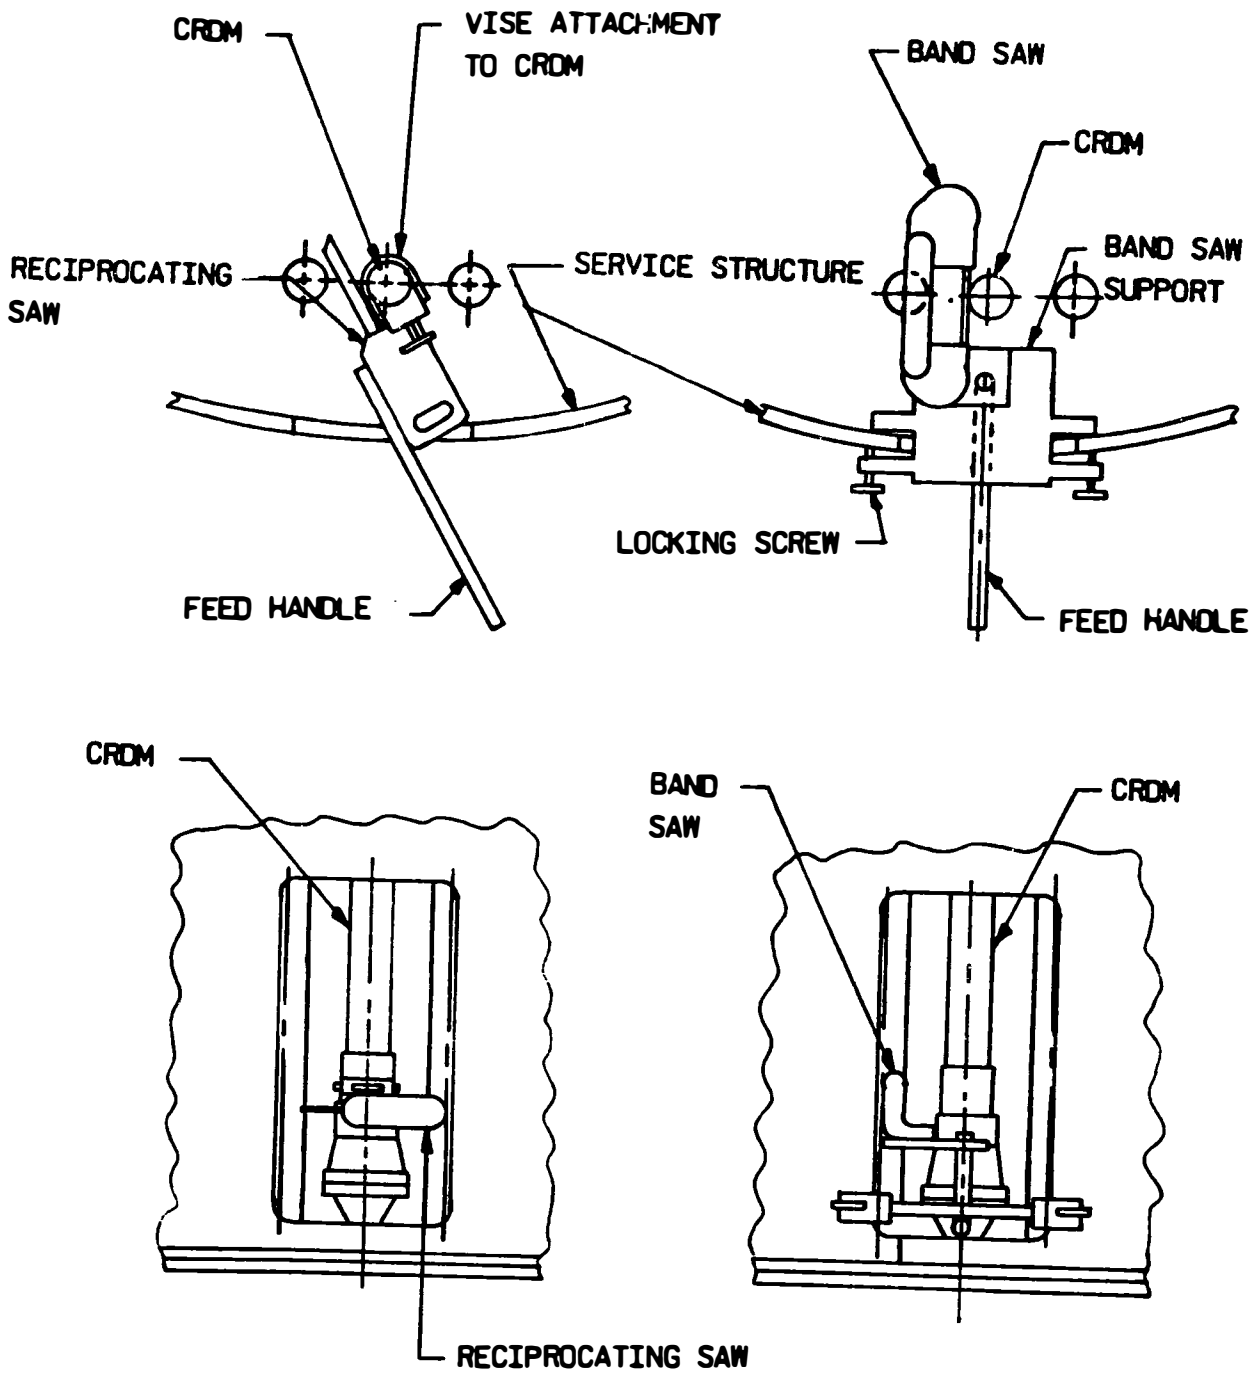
MOTOR TUBE/LEADSCREW CUTTING CONCEPT
